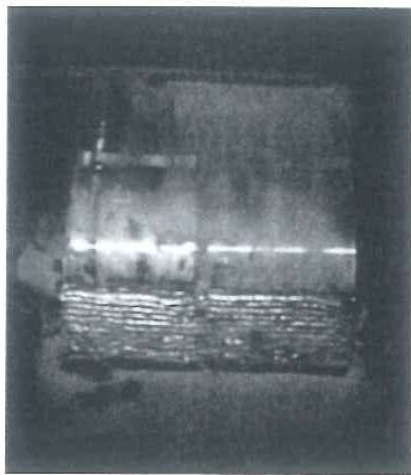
On-site welds (10CrMo9-10 and 12X1MF)
